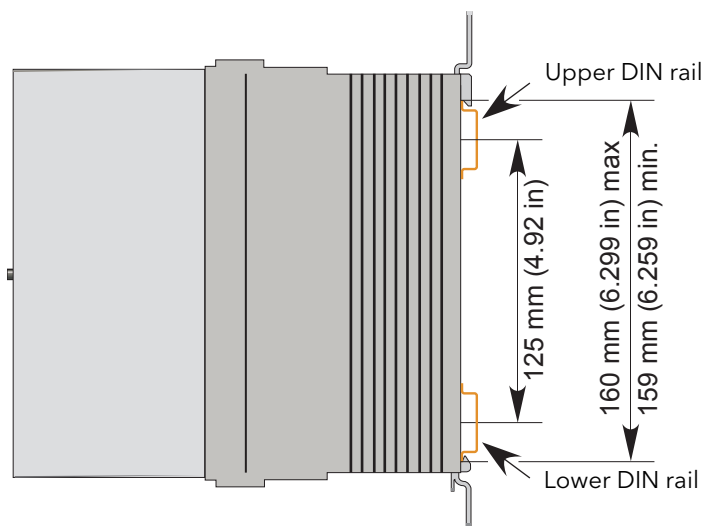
DIN rail mounting details for 80A, 100A and 125A units
